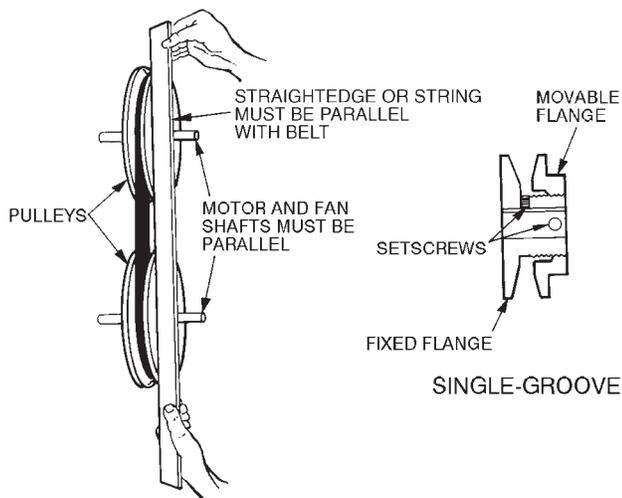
Evaporator-Fan Alignment and Adjustment
